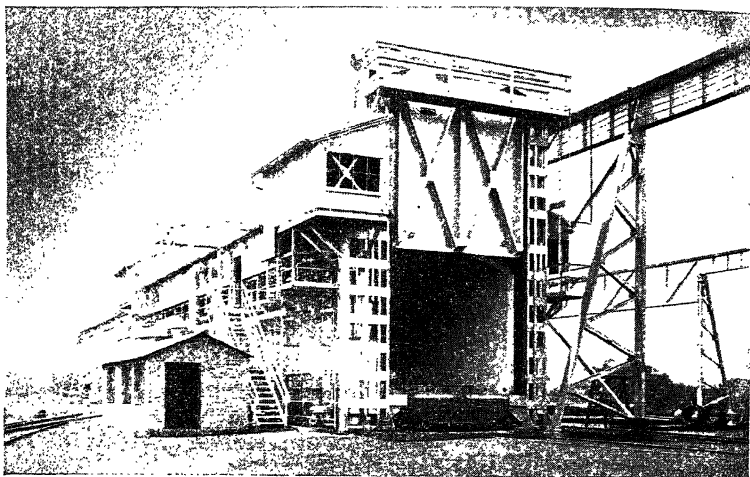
Large car bottom stress-relieving furnace. (Courtesy of Babcock and Wilcox Company.)
